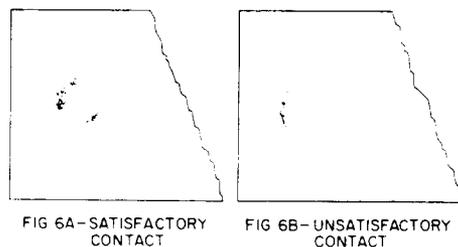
Carbon Impressions of Contact Between Holding Armature and Holding Magnet Core Pole Face
